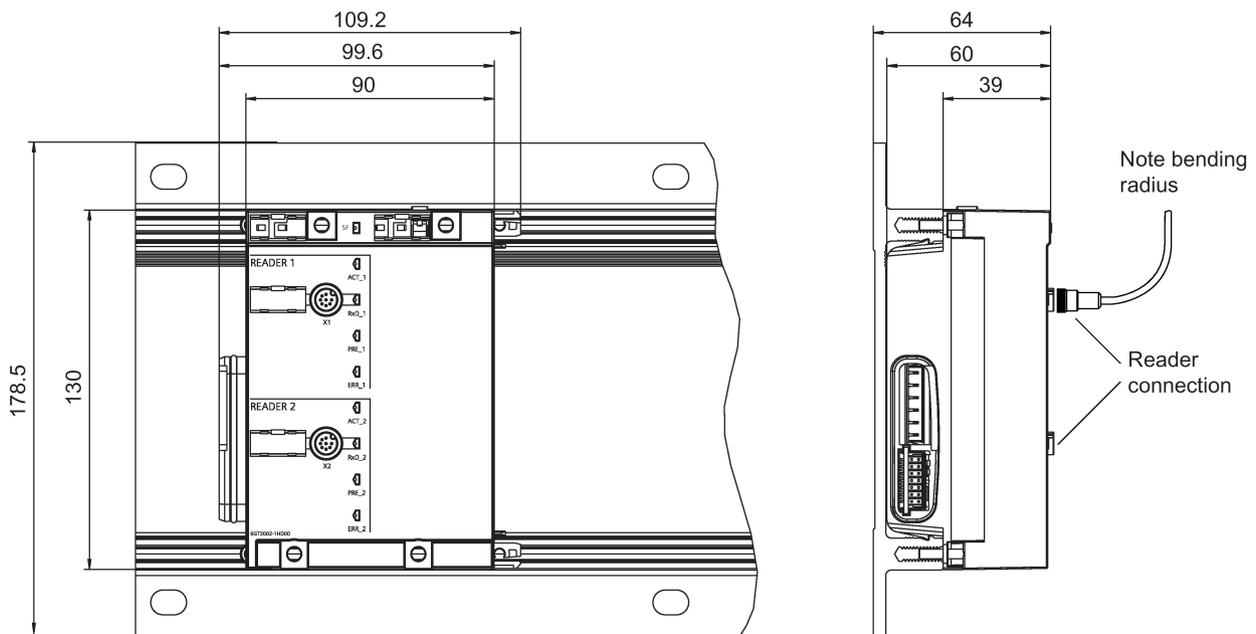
Dimension drawing for RF170C communication module with connection module on mounting rack, narrow
